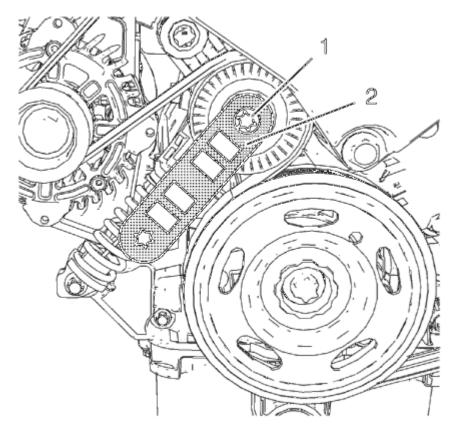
Drive Belt Tensioner & Bolts Courtesy of GENERAL MOTORS COMPANY
